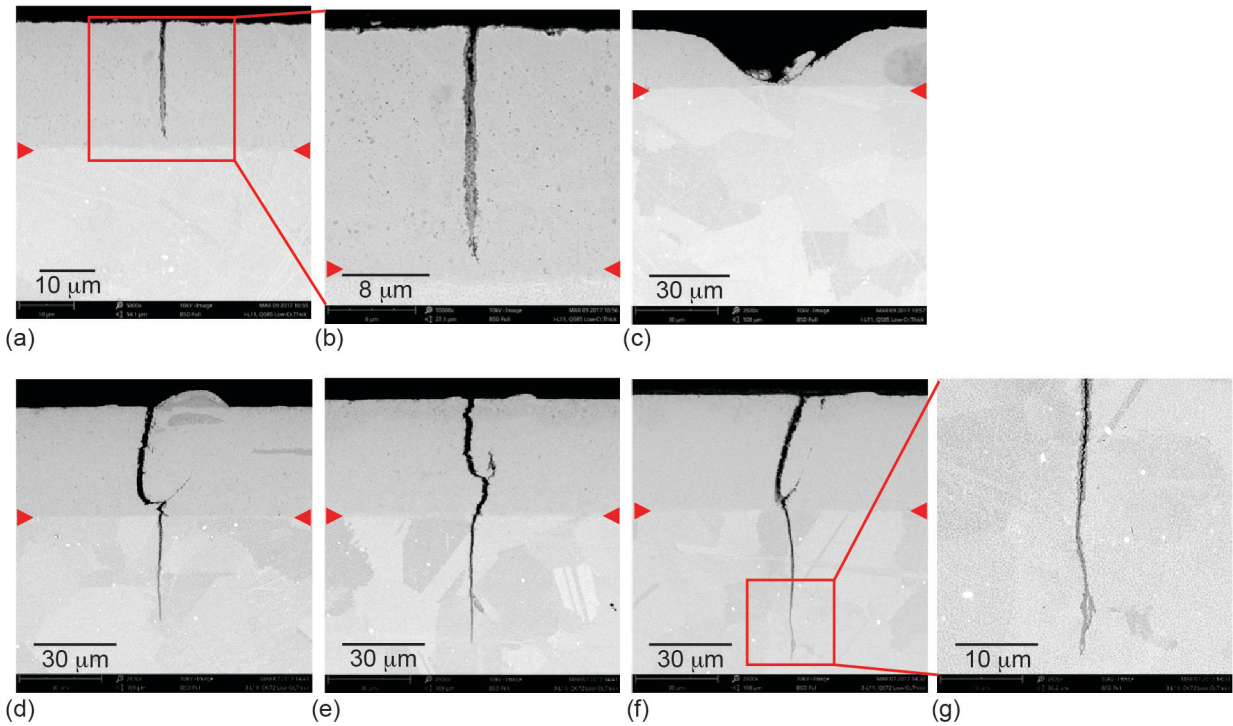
BSE images of the Low Cr, Thick coating after LCF testing showing (a,b) a linear gap defect in the coating filled with oxidation (perpendicular mount), (c-g) perpendicular fatigue cracks penetrating into the substrate (parallel mount).
